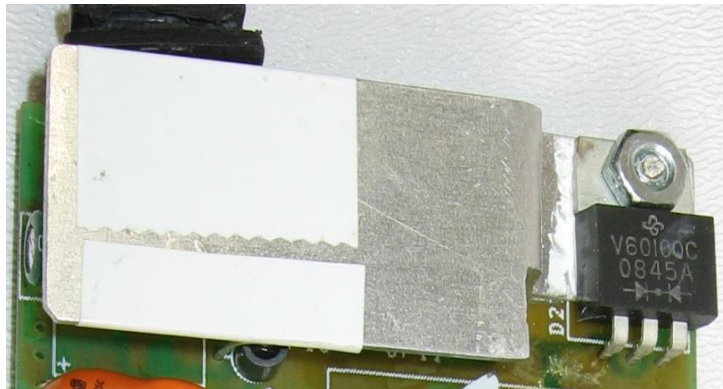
Wrap Diode Heatsink Diode with Tape.
